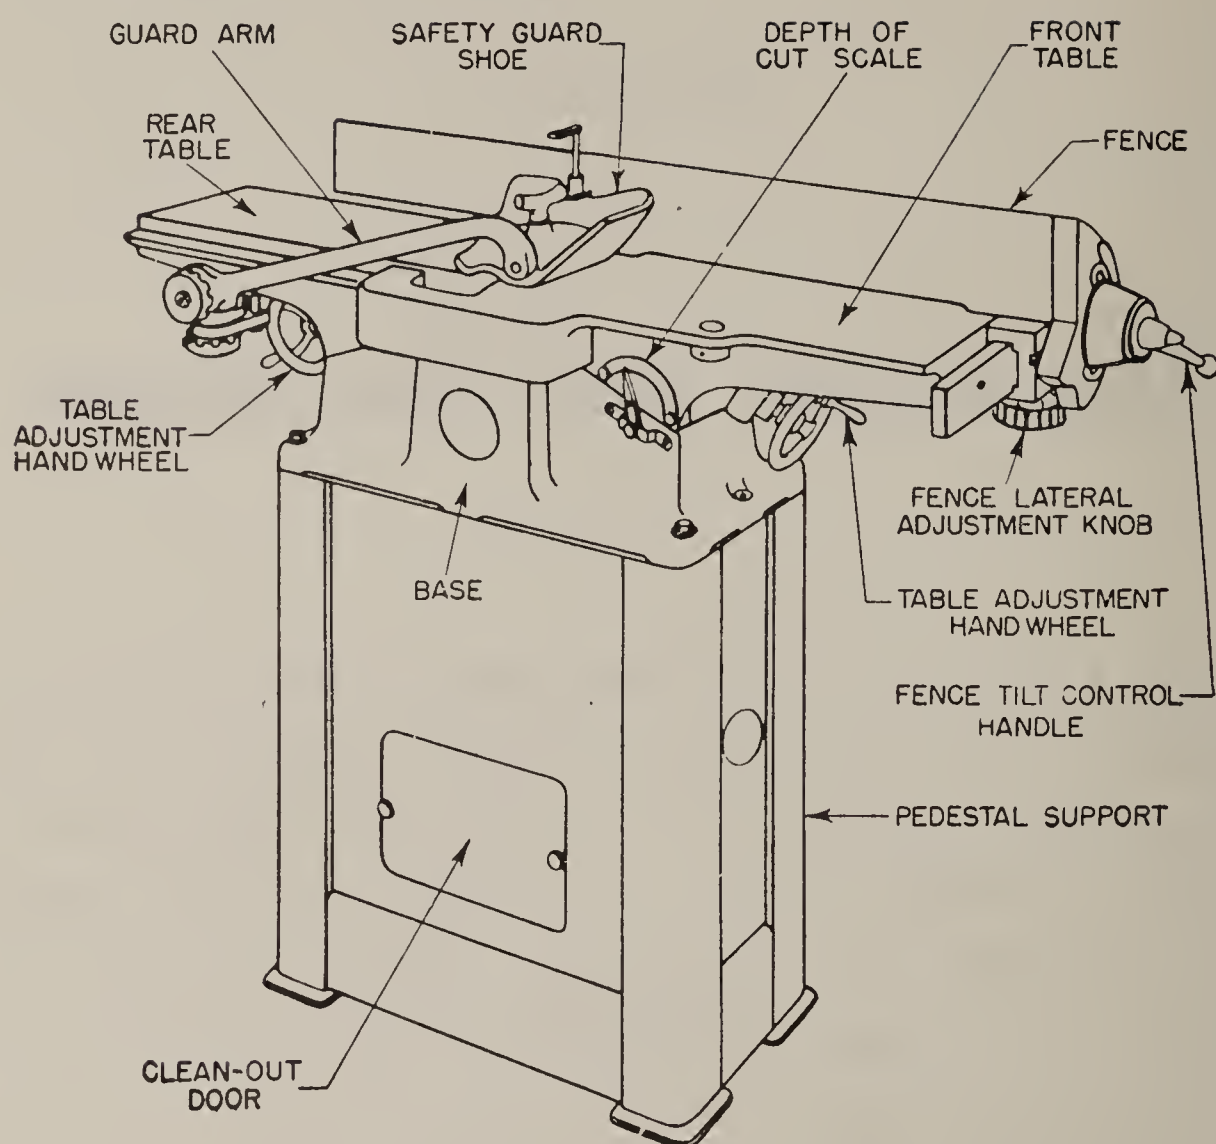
Typical 6-inch jointer equipped with a dual-purpose safety guard and hold-down shoe. Rear knife guard is hinged to the back of the fence, and covers the pulley and knives as the fence is moved over. The solid steel cutterhead is of the three-knife type, each knife being held by four jack screws and a chip breaker. The aluminum fence is movable laterally to full table width for rabbeting and is indexed by a plunger at 45 and 90 degrees. It is controlled by lock handles. Depth of cut is shown on the indicator in fractions of an inch. The cutterhead revolves at a speed of 3,900 rpm thus making $3 \times 3,900$ or 11,700 cuts per minute.
